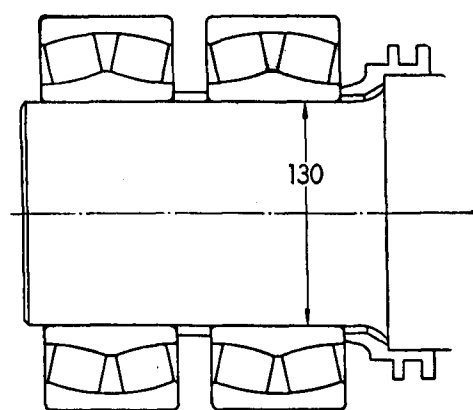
Axle bearing arrangement incorporating spherical roller bearings. U.I.C. 130 mm. journal. Bearing dimensions: $130 \times 230 \times 80$ mm.
